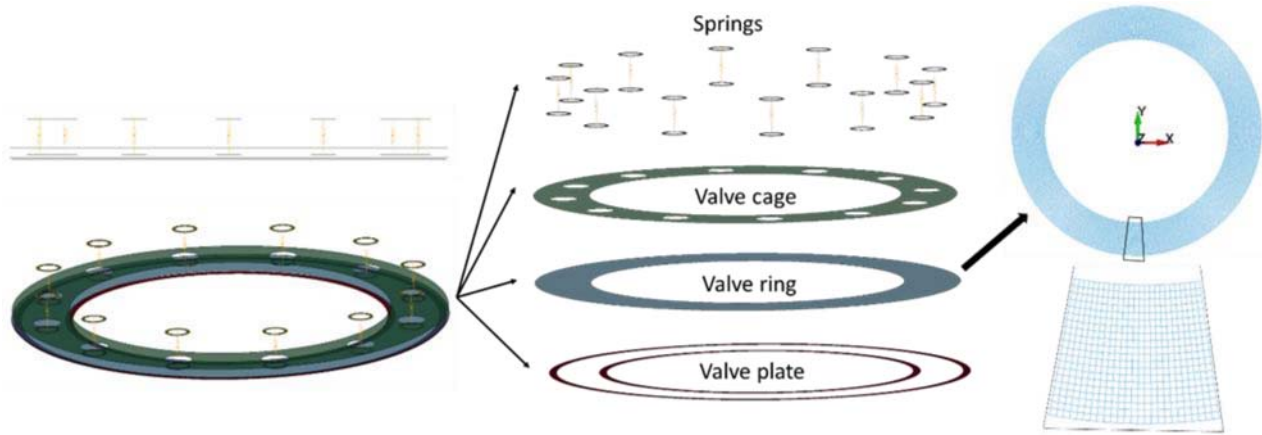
Discharge valve assembly as represented by the FE model with a zoomed section on the ring part showing the FE mesh.
